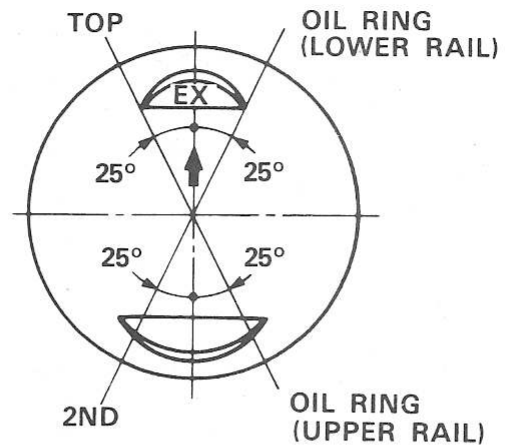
B.23 The piston ring end gaps should be positioned as shown (Sec 12)
